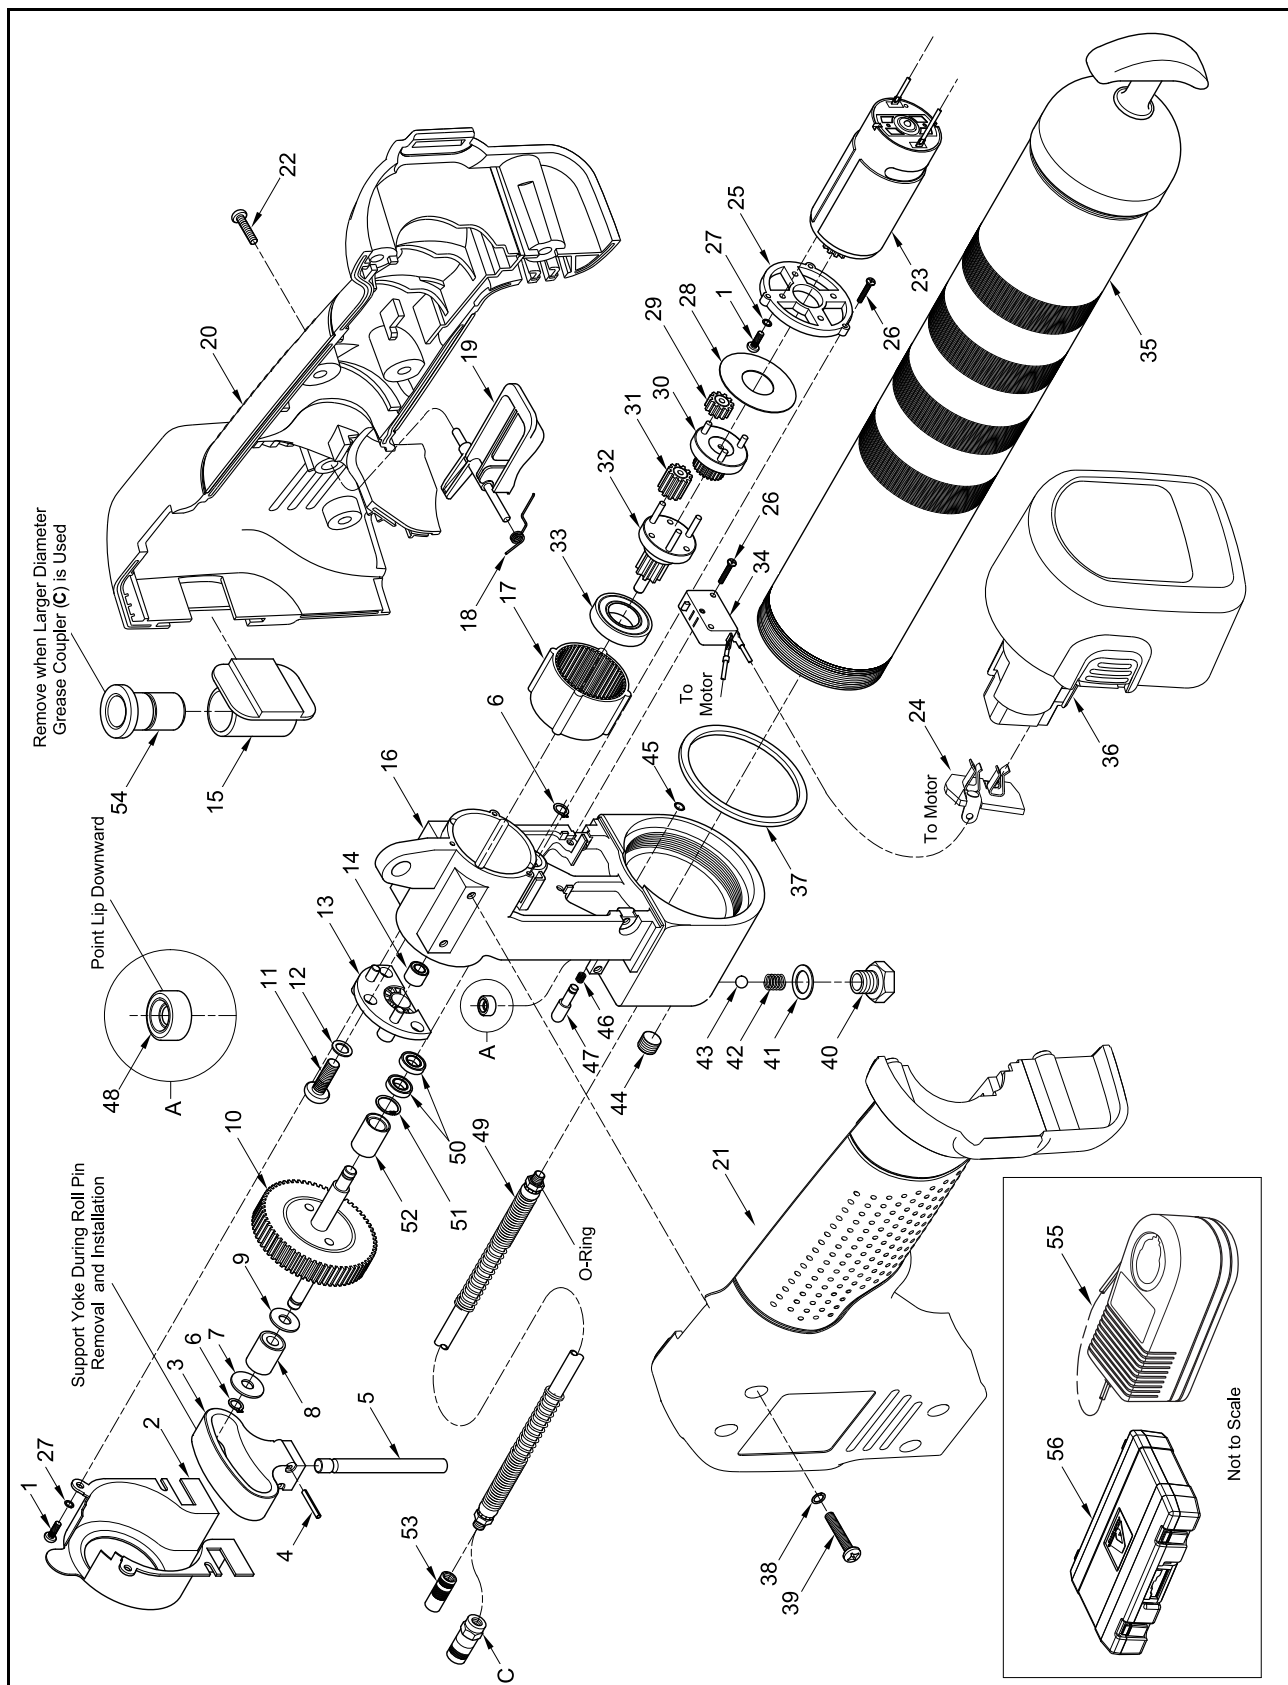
Cordless Grease Gun Models 575-A1 - 575-D1 - Exploded View
